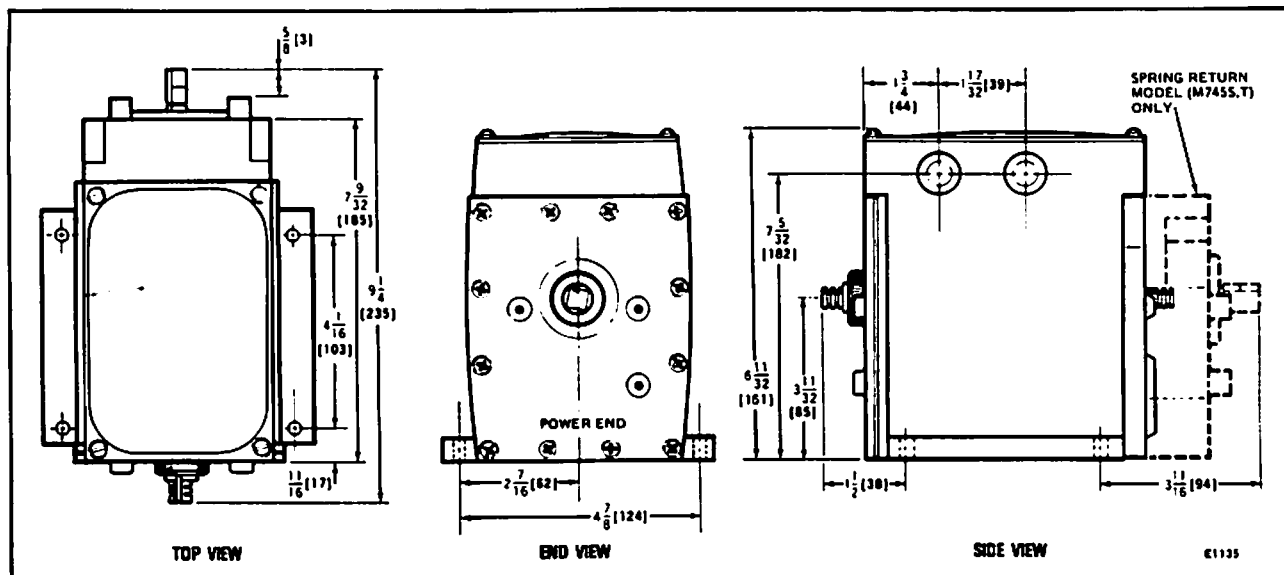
M744S,T and M745S,T MOUNTING DIMENSIONS IN in. [mm IN BRACKETS].
